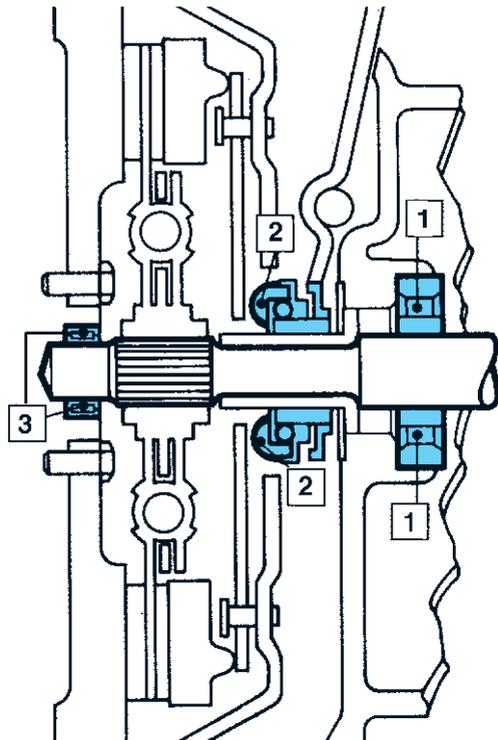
Any of these three bearings can cause noise. A faulty transmission input shaft bearing (1) will cause noise while the clutch is engaged; a faulty release bearing (2) will cause noise with the pedal depressed; and a faulty pilot bearing (3) will cause noise while the clutch is released. (Courtesy of LUK Clutches)
